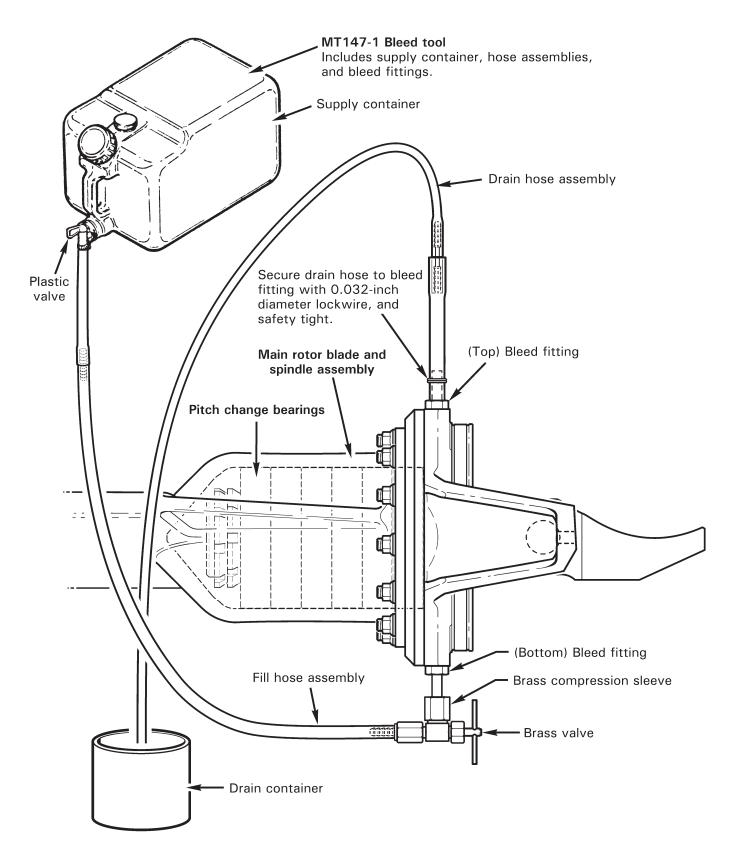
MAIN ROTOR BLADE PITCH BEARING HOUSING
